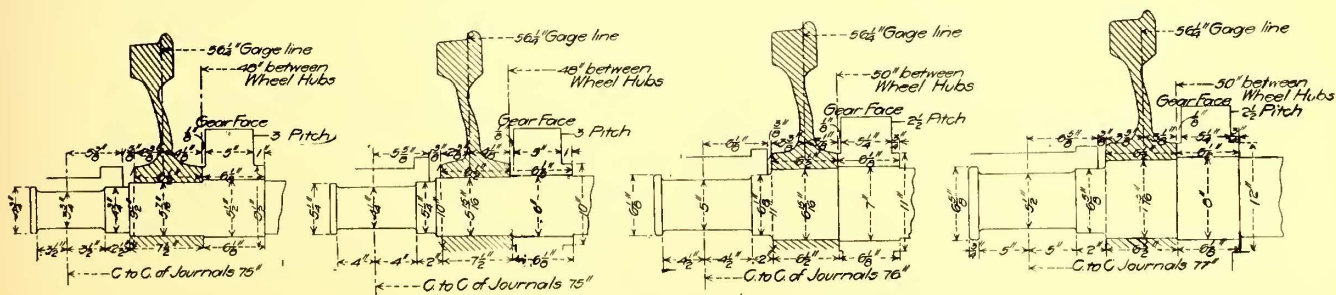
PROPOSED GEAR AND WHEEL HUB STANDARDS
